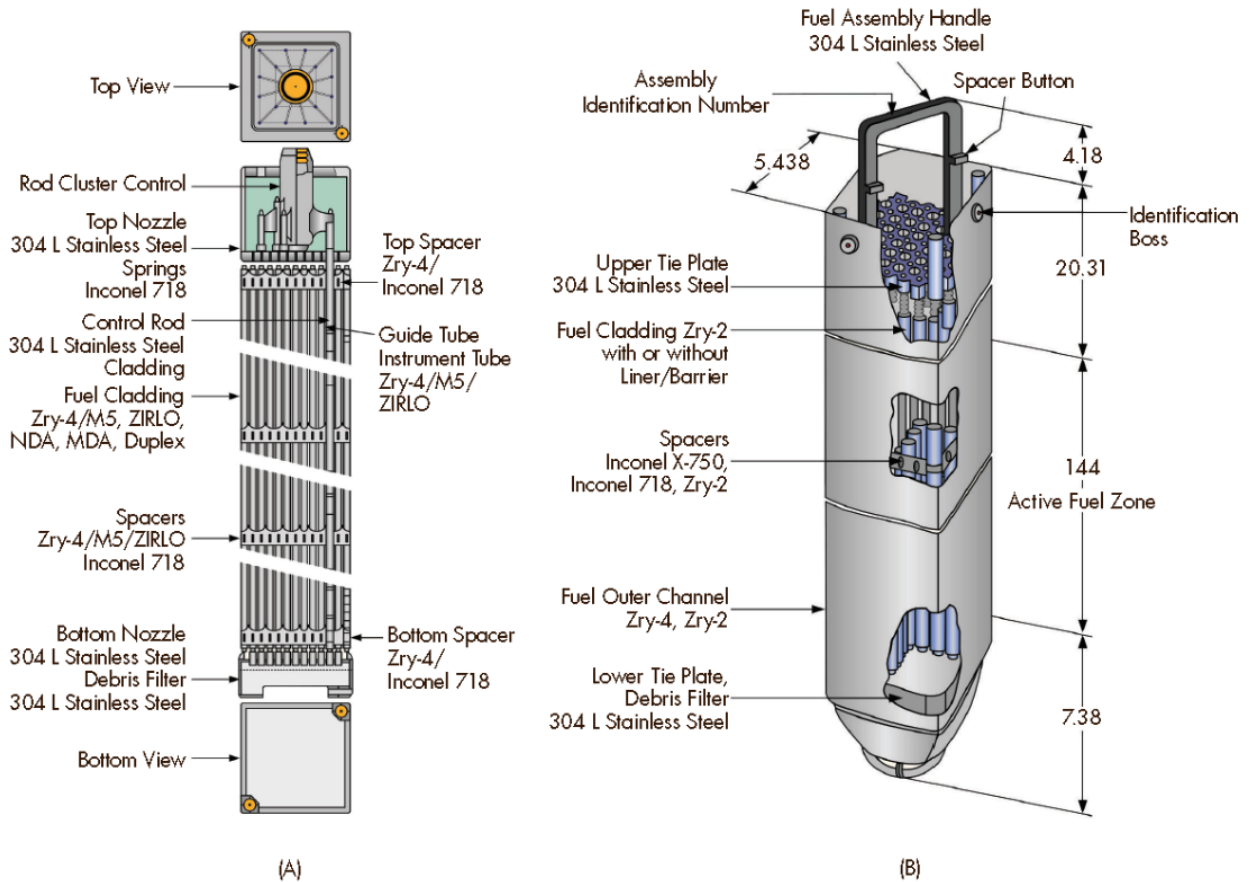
Schematics of PWR (A) and BWR (B) fuel assemblies.
